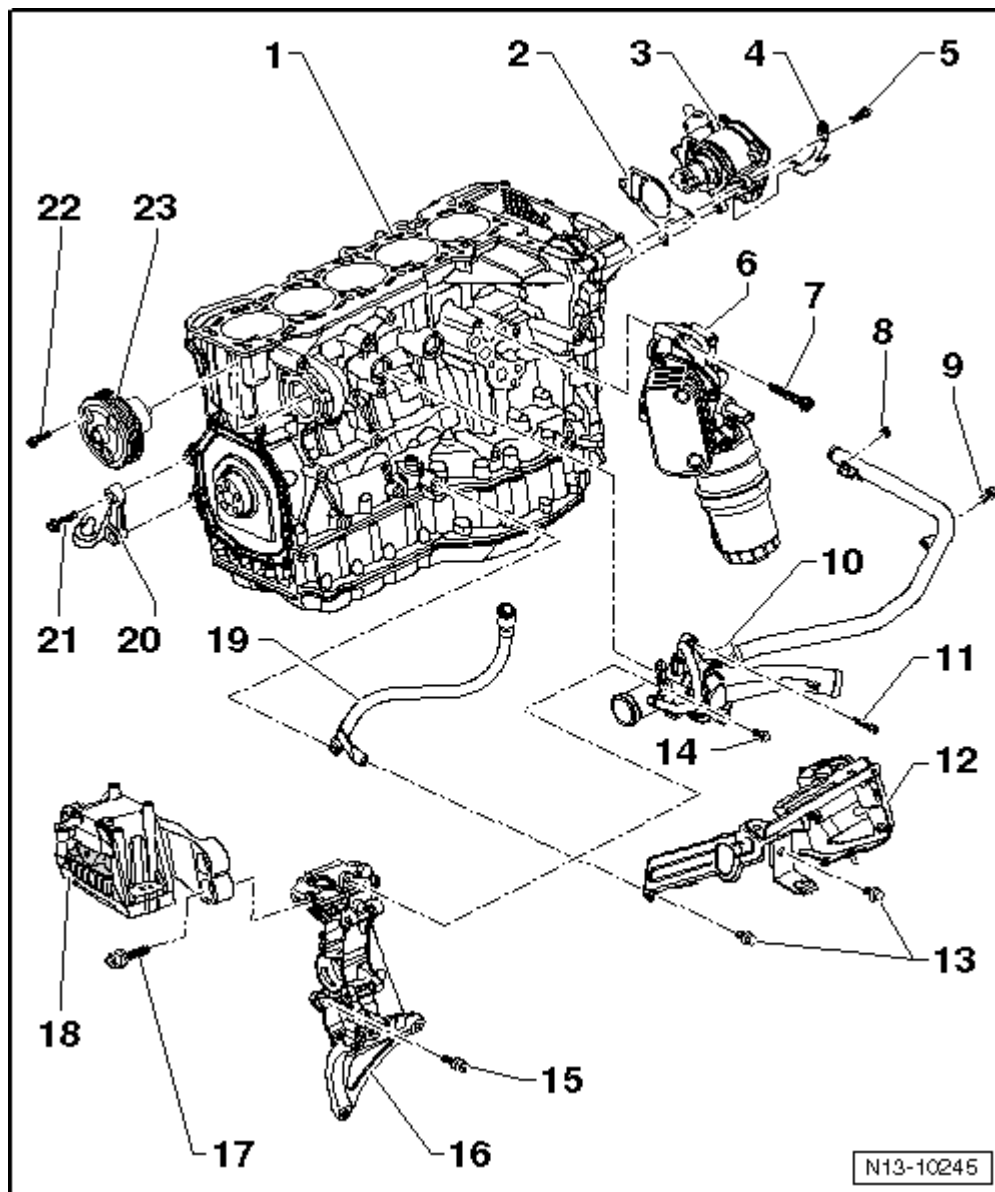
Attachments, Assembly Overview - Part II - Engine Front/Side
